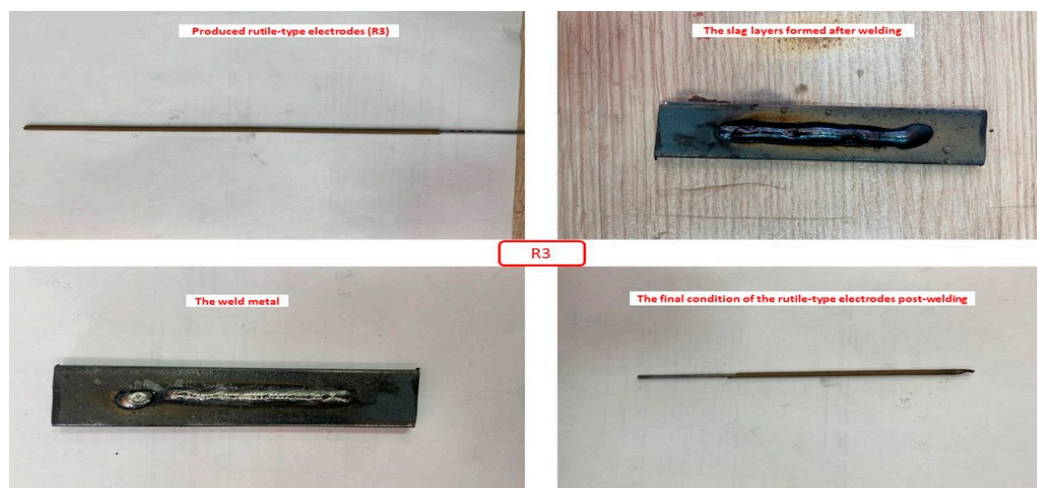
Weld appearance and test results for R3 rutile-type coated electrode (40% slag).
